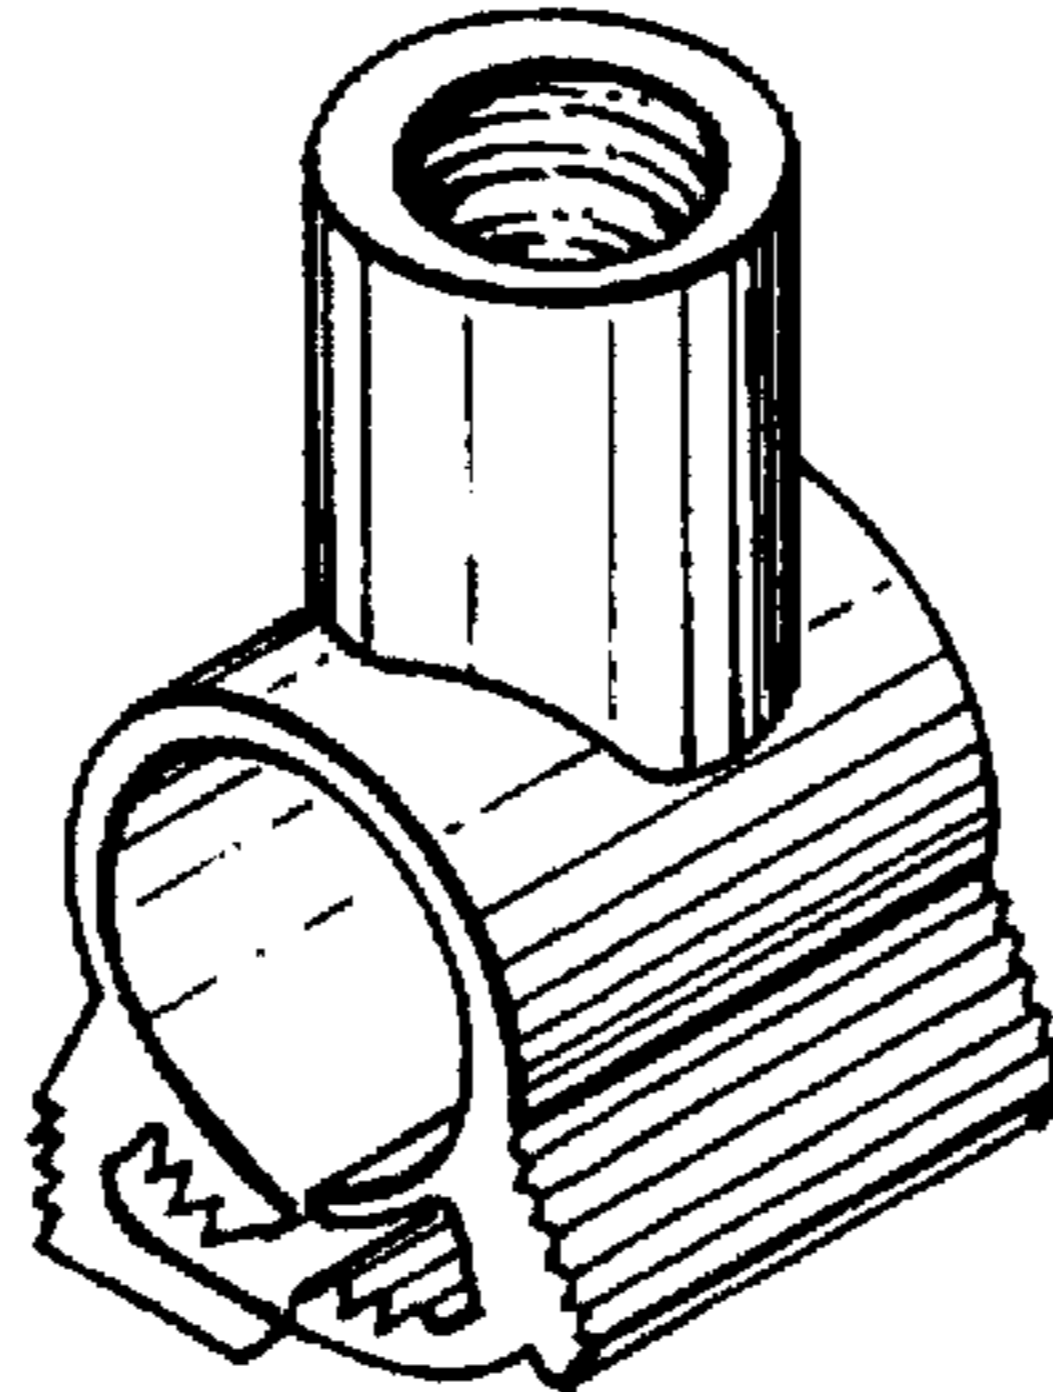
is a front elevational view of the tapping fixture of the present invention;
